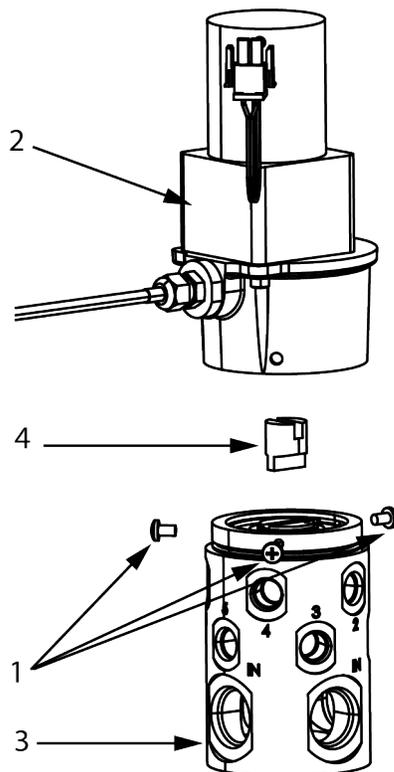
Motor Encoder Assembly, Spool Coupler, and Selector Valve
